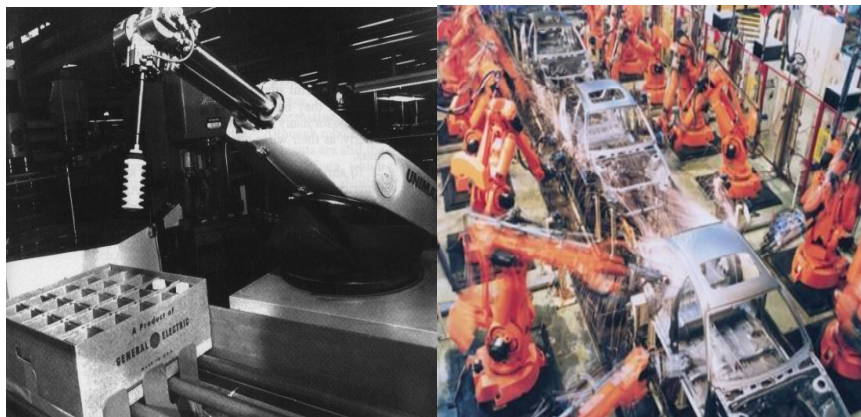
(Left) The Unimate robot [2]. (Right) Modern car assembly robots with welding end effectors [3].
